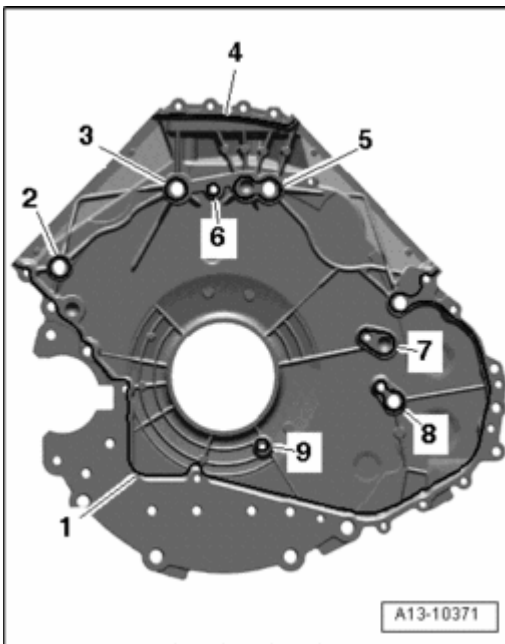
Applying Sealant Beads On Clean Sealing Surfaces Of Lower Timing Chain Cover
